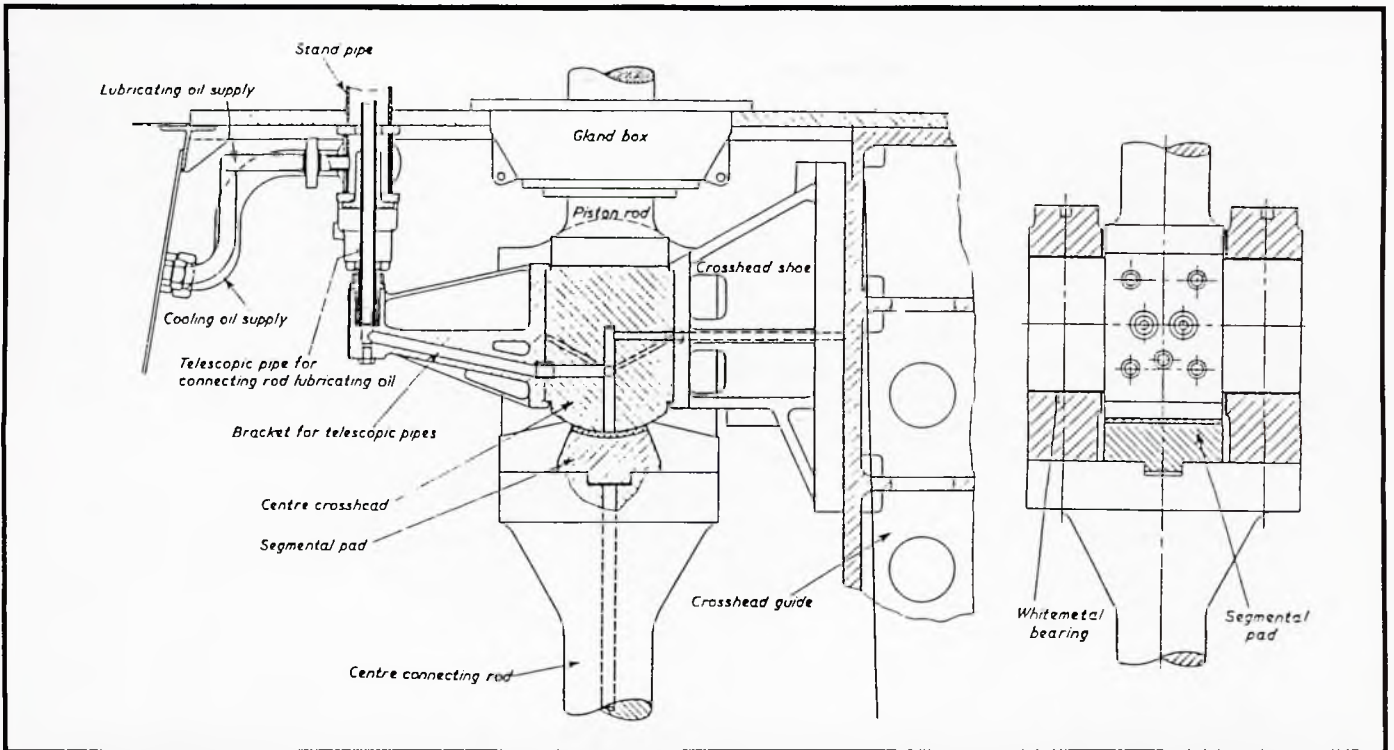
Crosshead designs in P-engines and early J-engines; centre top end with pad, crosshead and shoe assembly
